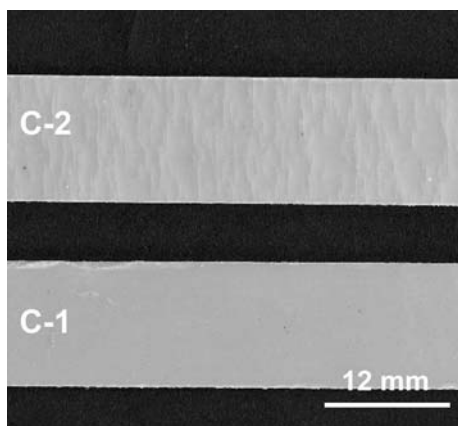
Sections of tensile fractured tensile bars for a C-2 and a C-1 specimens
